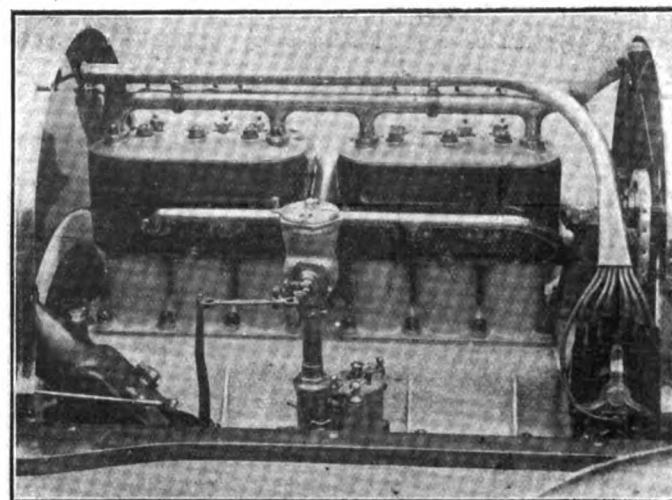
The Engine of the Delaunay-Belleville 15-h.p. Six-Cylinder Car.
